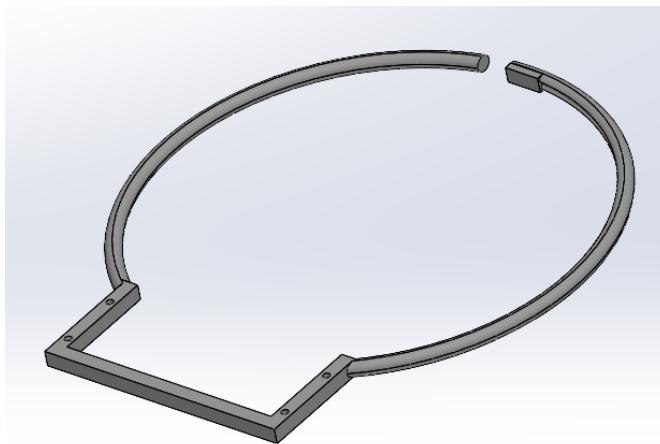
NECKLACE MOUNT ISOMETRIC VIEW
